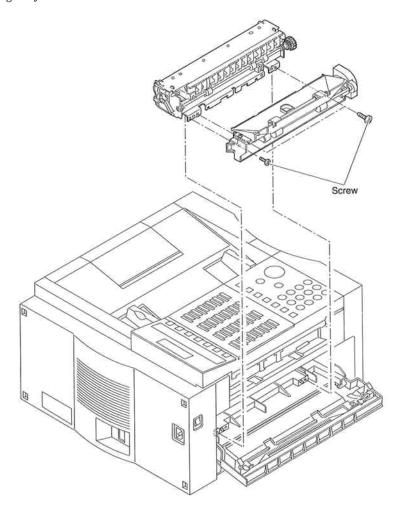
Disassembly Procedure (Fixing ass'y)
